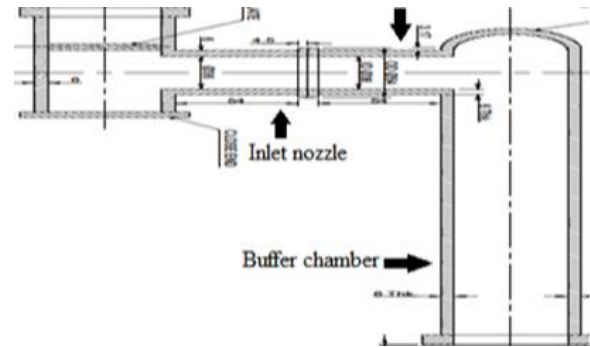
CAD model of pressure relief valve with buffer chamber.
